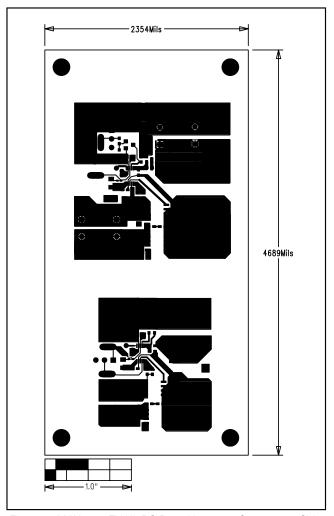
MAX8576 EV Kit PC Board Layout—Component Side
